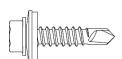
#10-16 PANCAKE HEAD TYPE 10 SCREW
